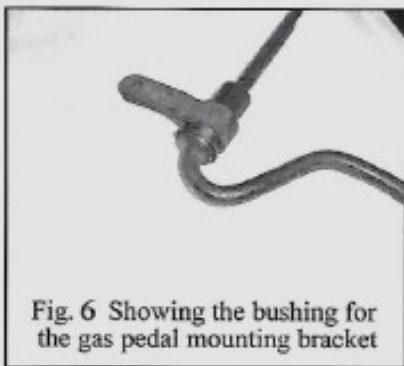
Showing the bushing for the gas pedal mounting bracket
